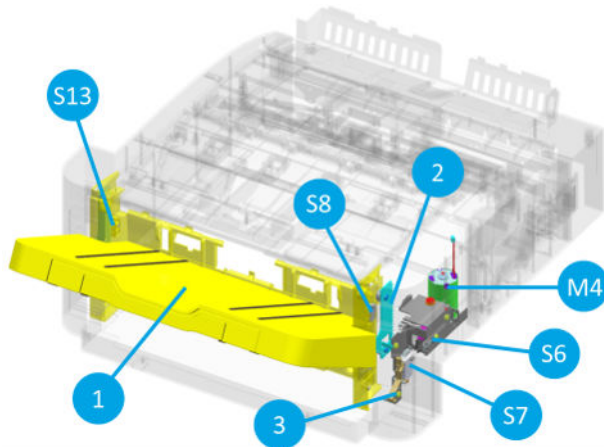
Inner finisher system - output tray unit detail view (1 of 2)
